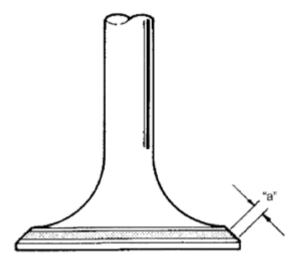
Identifying Standard Seating Width Courtesy of SUZUKI OF AMERICA CORP.
